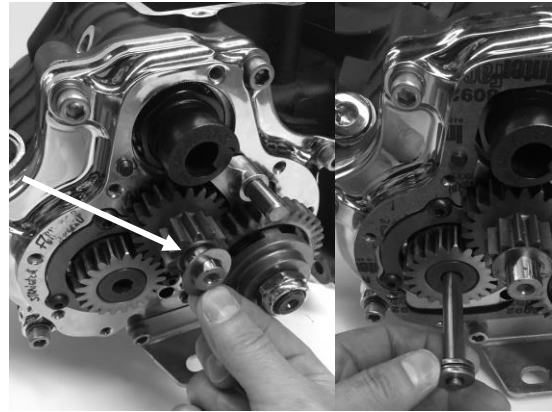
| THRUST WASHER, RELEASE AND ACTUATOR ROD INSTALLATION
